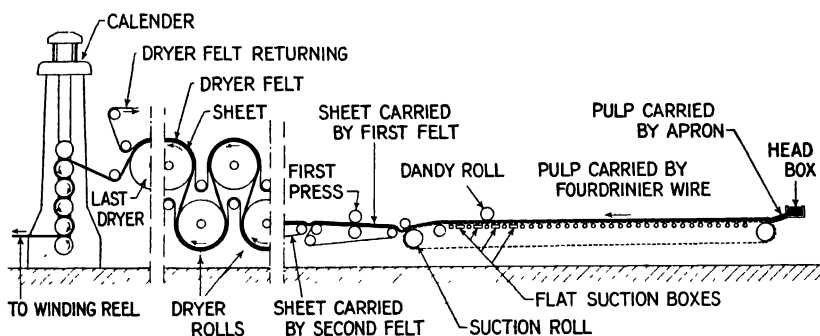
Diagrammatic Sketch of Fourdrinier Paper Machine.
